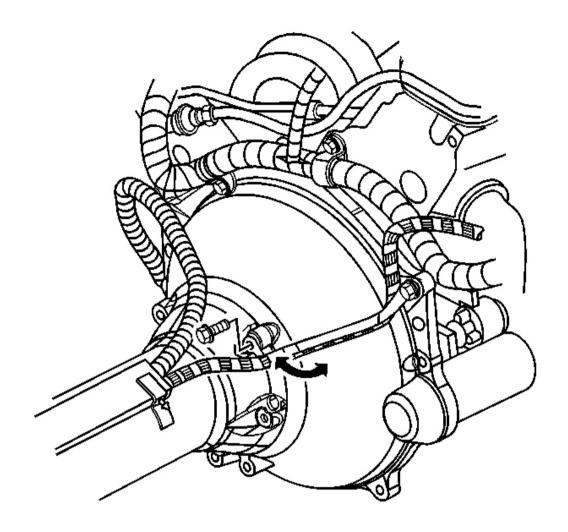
Wiring Harness Bracket Courtesy of GENERAL MOTORS CORP.
